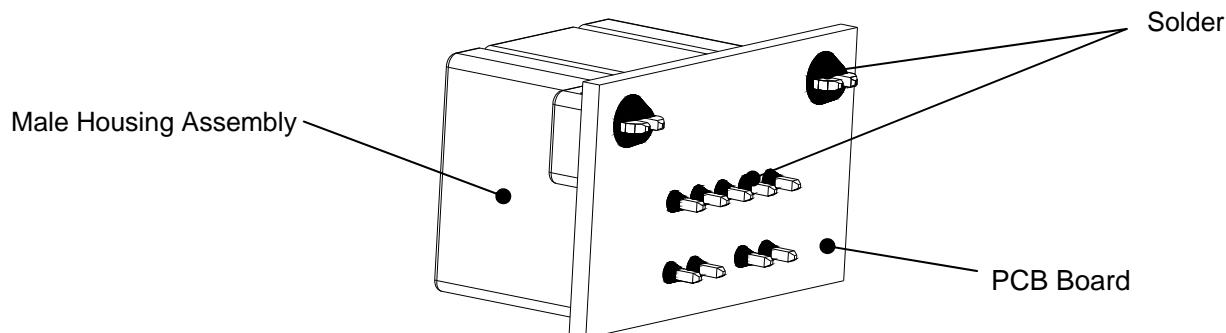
Placing the Male Assembly on the PCB Board (e.g. 9 positions)
